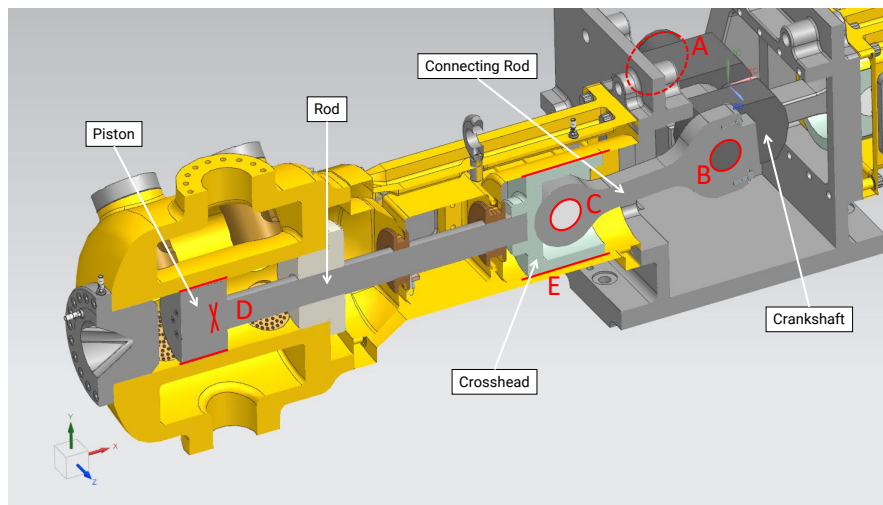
Cross section of the cross head compressor with the joints marked in red, Ariel compressor [16]. Reciprocating masses of 272.4 kg, crank length of 82.56 mm, connecting rod length of 533.4 mm, piston diameter of 254 mm, piston rod diameter of 101.4 mm
